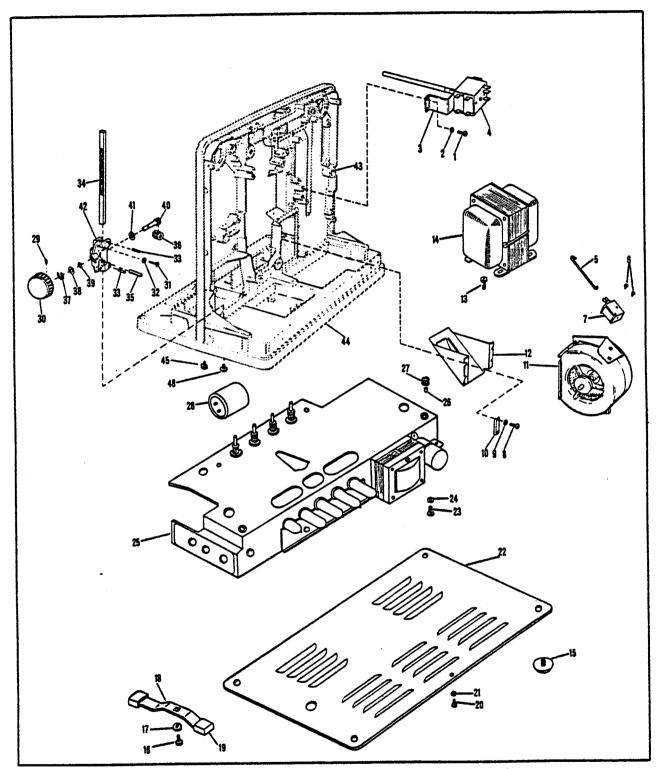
Filmosound Projector Main Plate Exploded (Sheet 4)
